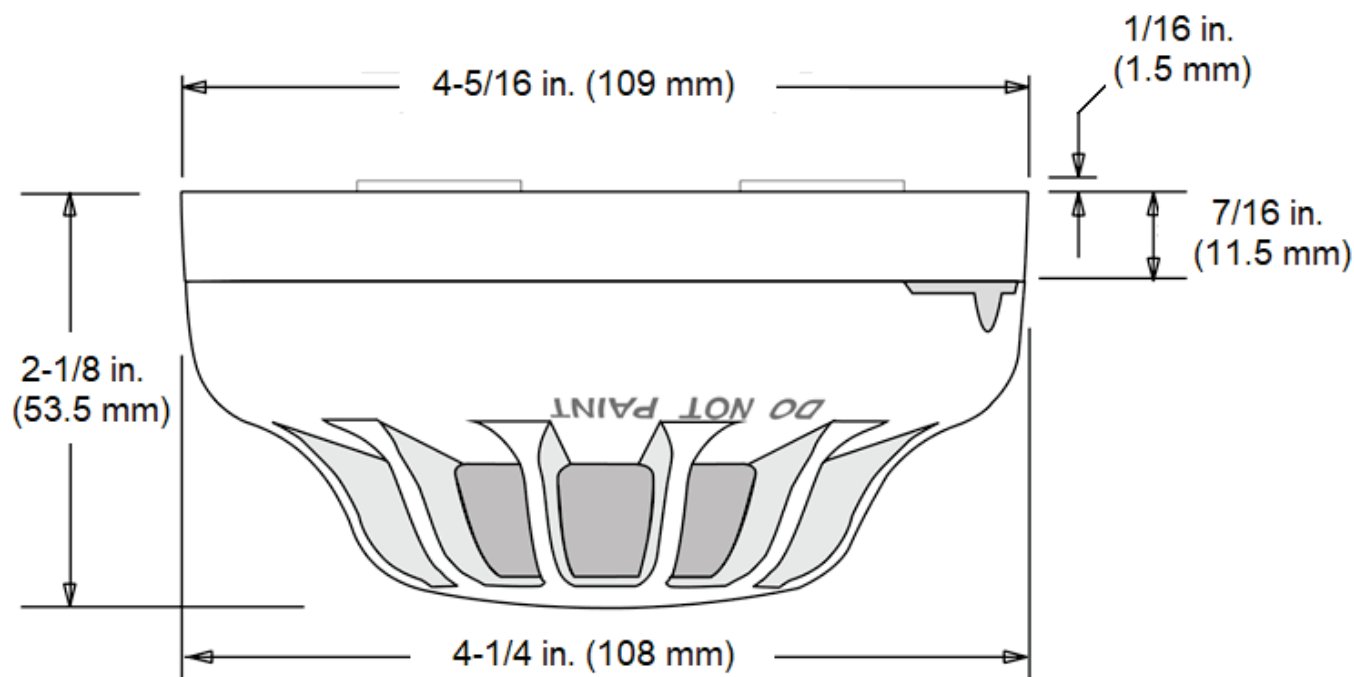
4098-5601 and 4098-5602 dimensions mounted on base
